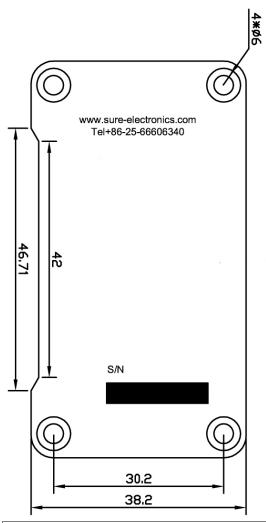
MECHANICAL DRAWING OF THE RIGHT PANEL
